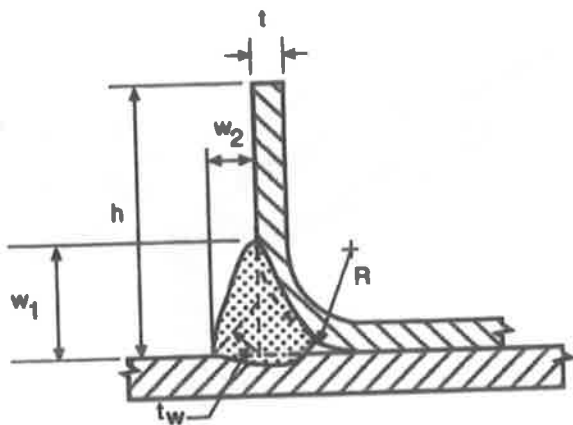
Flare Bevel Groove Weld (Not filled flush to surface, $w_1 > R$)
